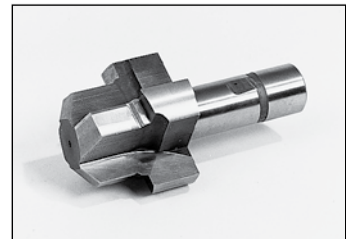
SAE Straight Thread Port Counterboring Tool
